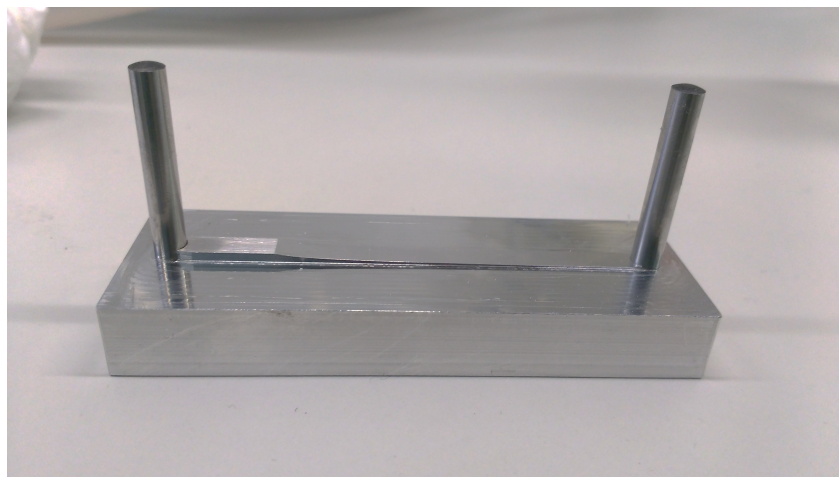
The gradient channel mould geometry manufactured with a micro milling machine.
